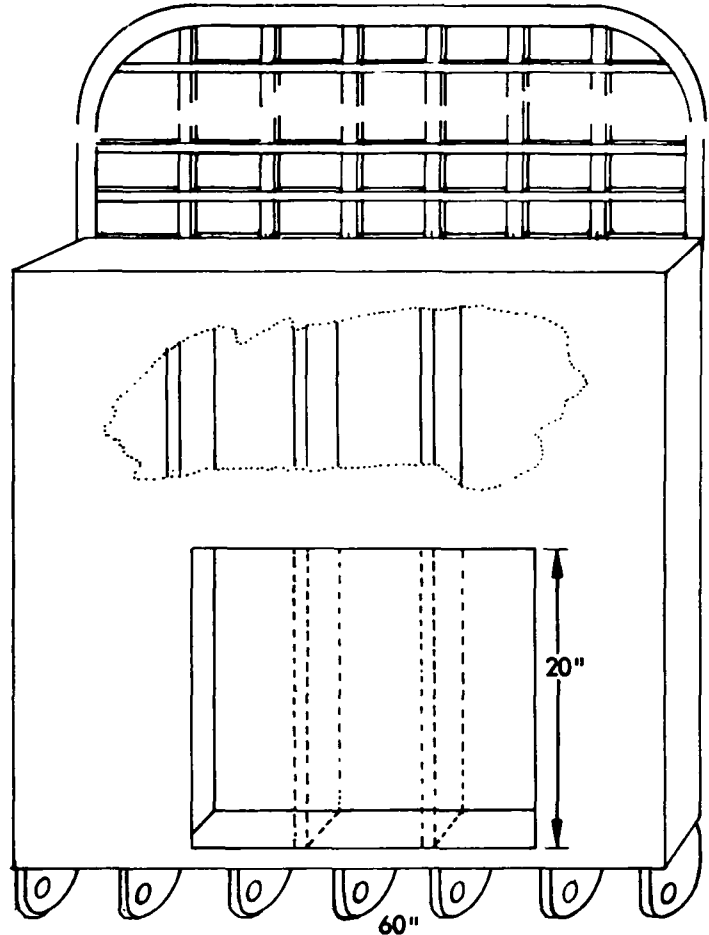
Typical Internal Structures Encountered in Hole Cutting
